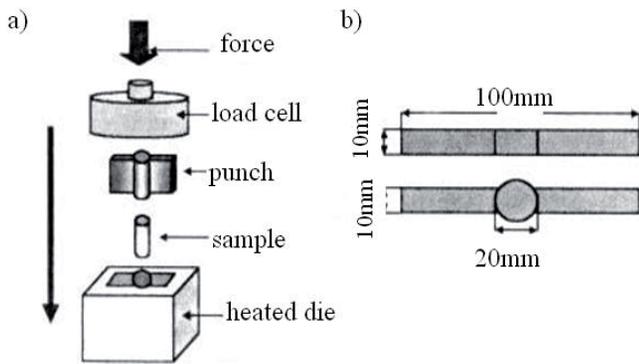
Schematic illustration of (a) the thixoforging operation; (b) dimensions of final product
